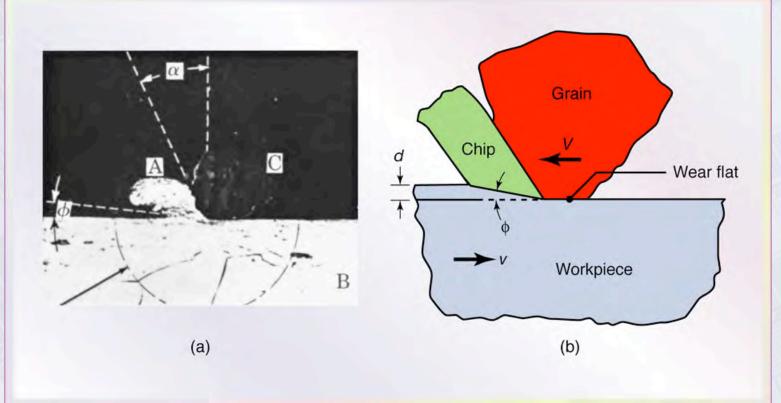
(a) Grinding chip being produced by a single abrasive grain: (A) chip, (B) workpiece, (C) abrasive grain. Note the large negative rake angle of the grain. The inscribed circle is 0.065 mm (0.0025 in.) in diameter. (b) Schematic illustration of chip formation by an abrasive grain with a wear flat. Note the negative rake angle of the grain and the small shear angle. *Source:* (a) After M.E. Merchant.
